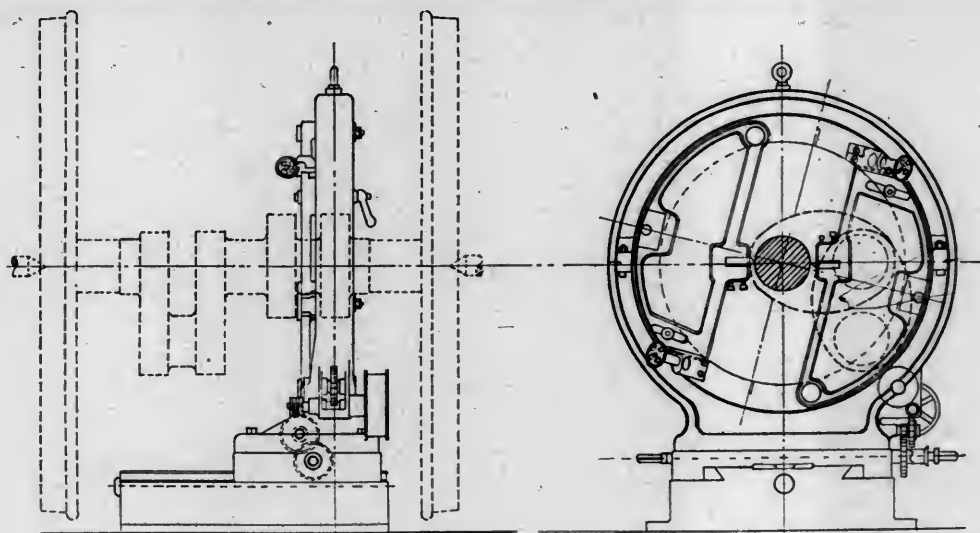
AN EUROPEAN CRANK AXLE RE-TURNING MACHINE.
